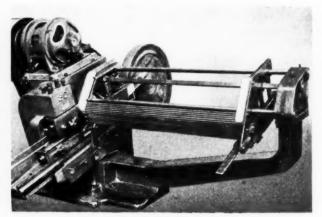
Thread-rolling Machine Designed to Handle Long Rods
